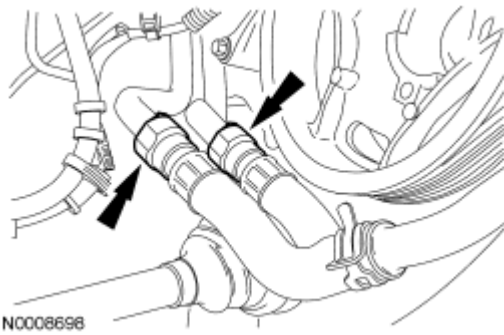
Locating Quick Disconnect Oil Cooler Coolant Tubes
